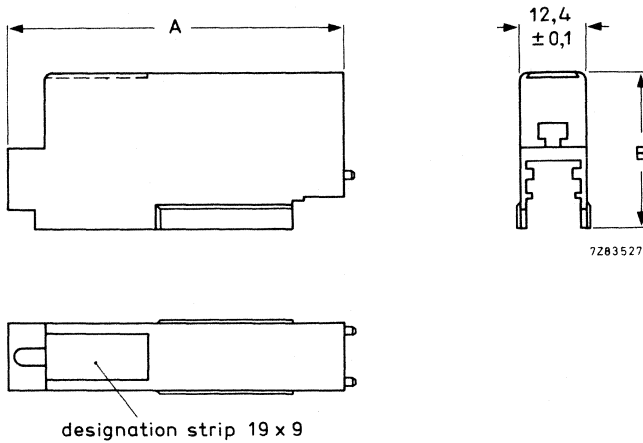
Cable hood; see Table 4 for dimensions A and B.
